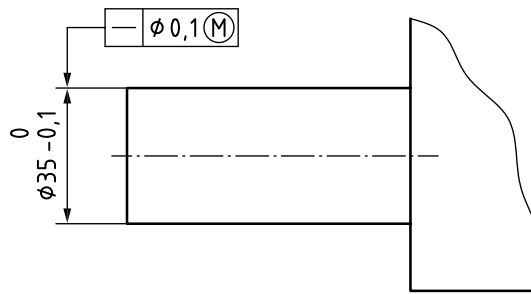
Example on drawing indication (adapted from ISO 2692:2021, Figure A.2 a) “Drawing indication”)
